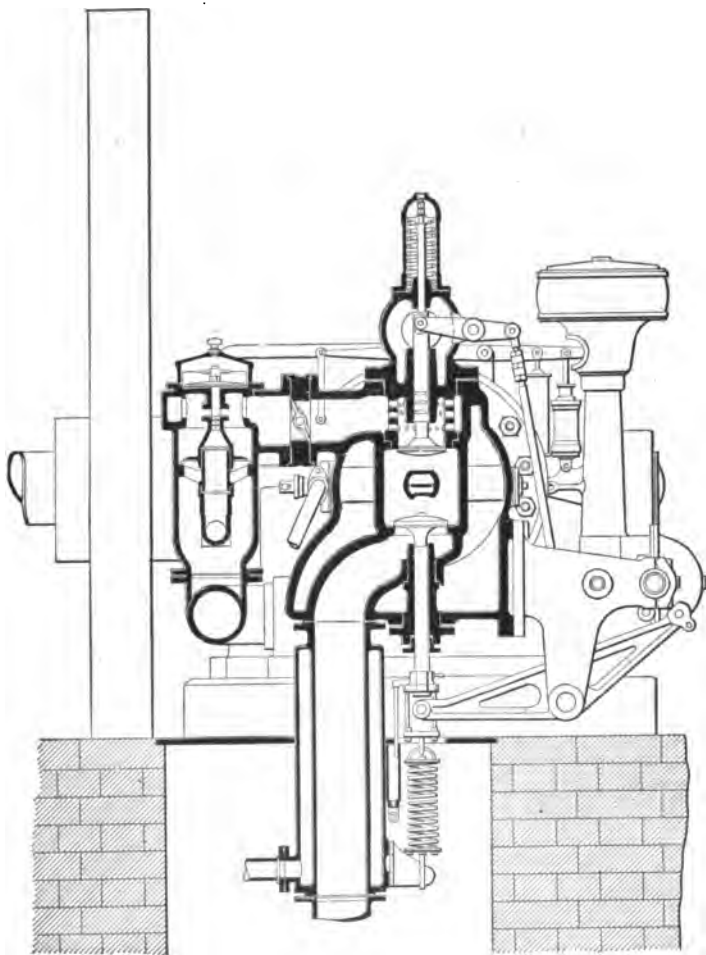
Valve Gear, Koerting Four-cycle Engine.
